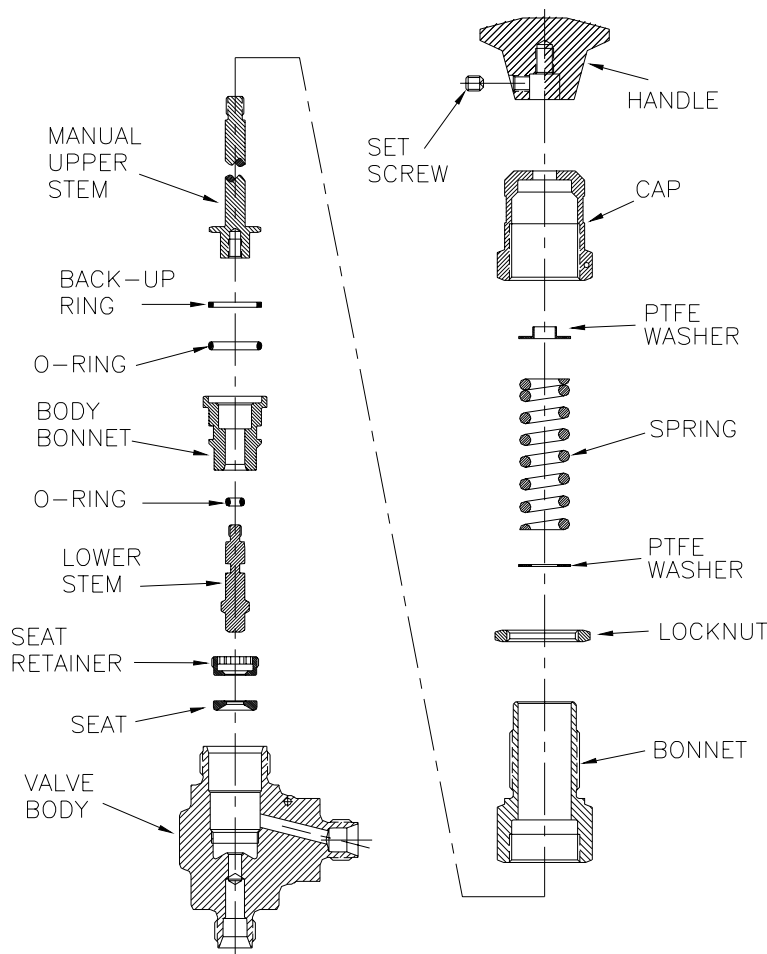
RH Series Relief Valve with Manual Override Exploded View
